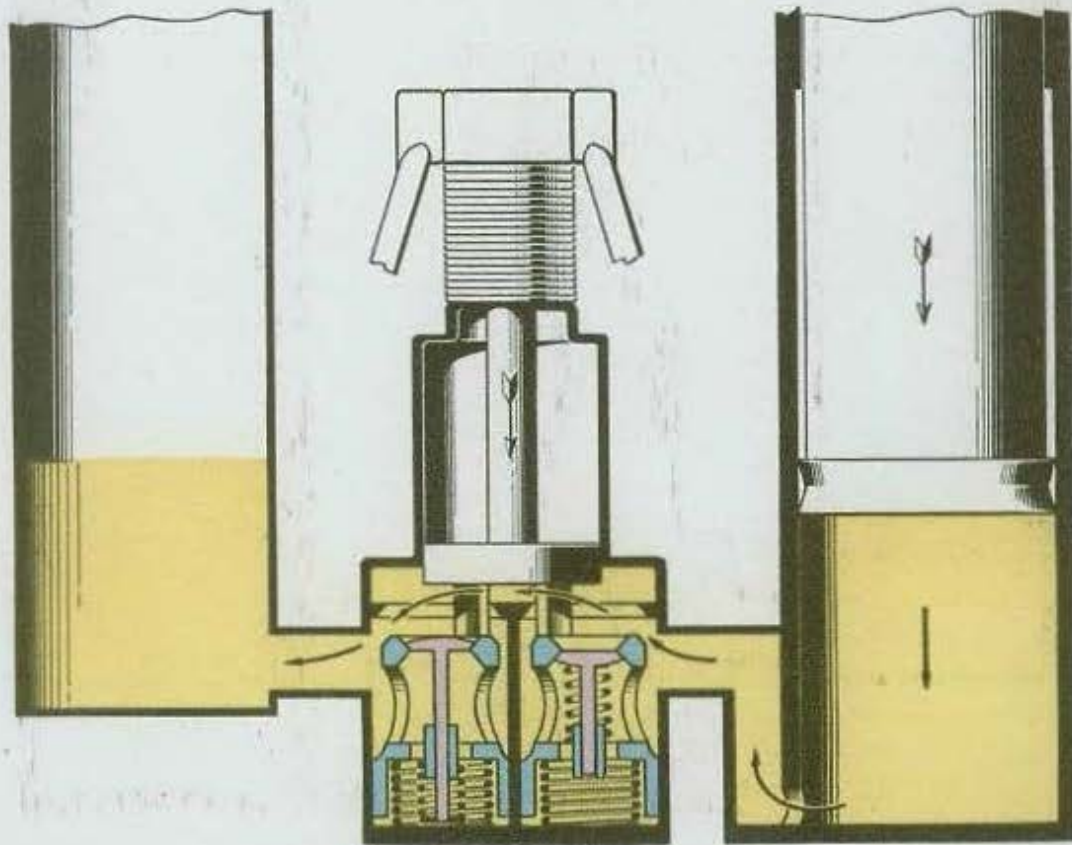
Valve sleeves forced off seats in base—ram discharging oil back into tank
